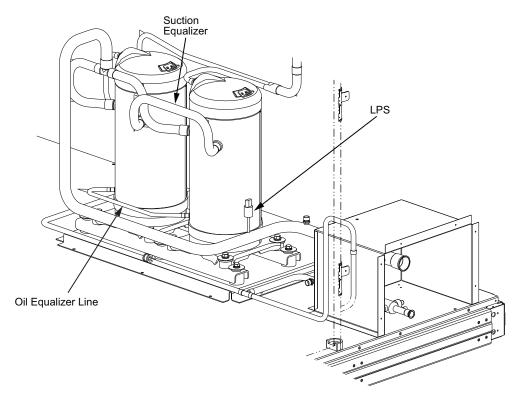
569L*16(M,N) Compressor Assembly (Rear View)
